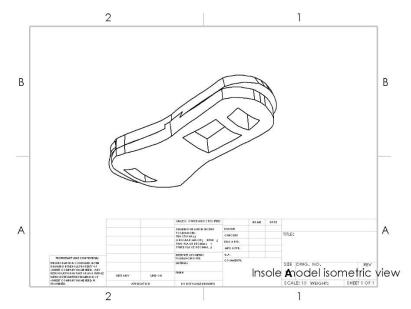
Dimensioned isometric drawing of SOLIDWORKS Model.
